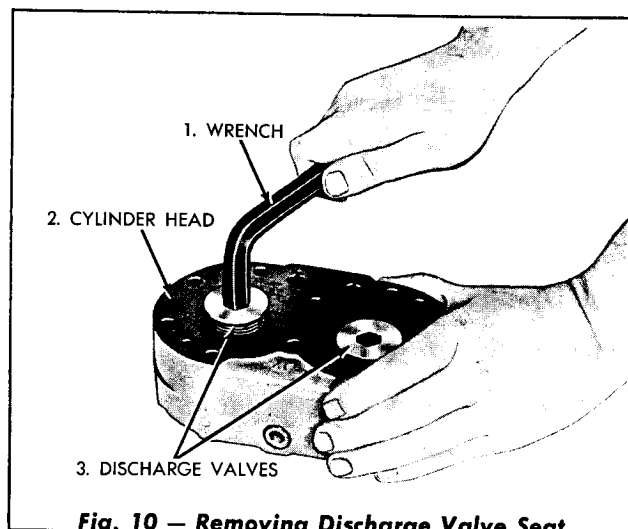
Removing Discharge Valve Seat from Cylinder Head
